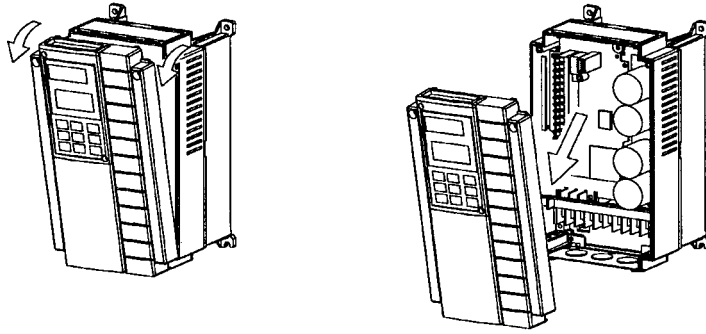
Removing the surface cover (for inverter of 22kW or less)
